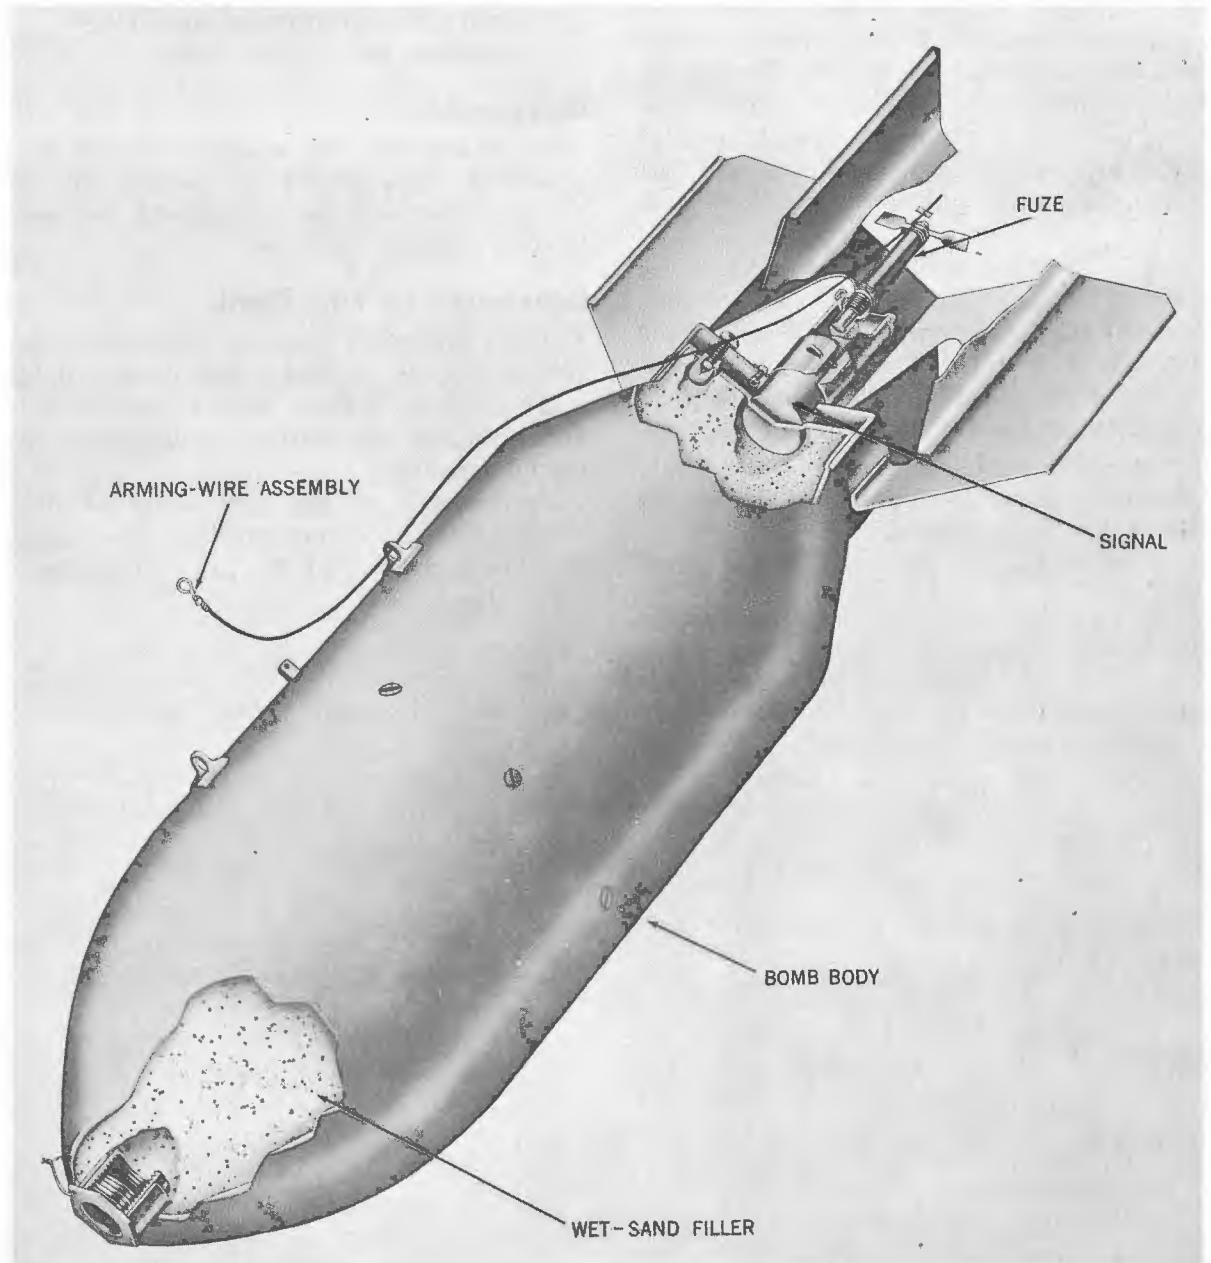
1000-lb Practice Bomb Mk 66 Mod 0, Cutaway View.
